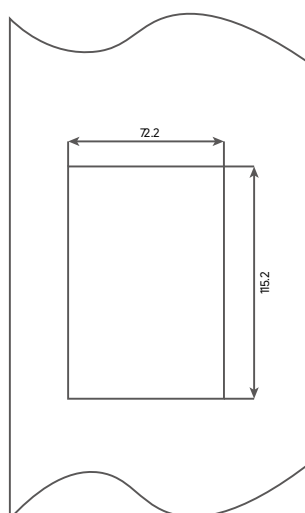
Dimensions of opening holes on the operation panel (keypad)
